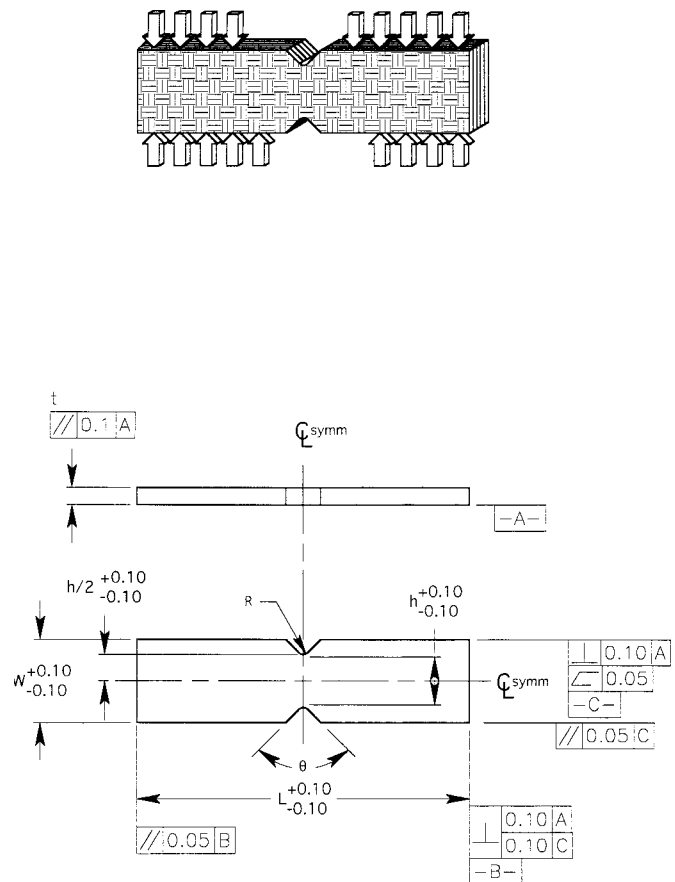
Schematic of Test Fixture for the Iosipescu Test
